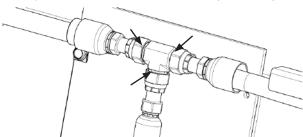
Check T Fittings On Front Side of Struts for Leaks
